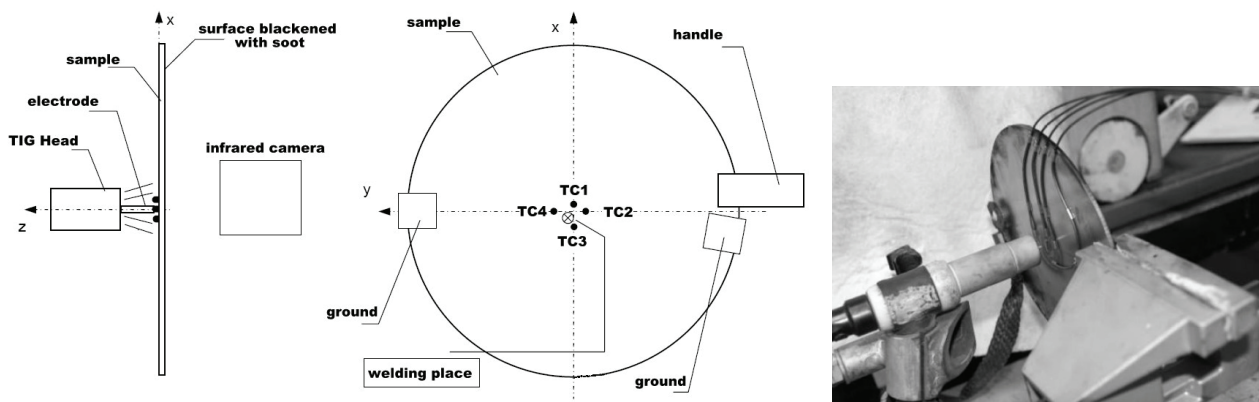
Configuration of the TIG welding experimental process.
